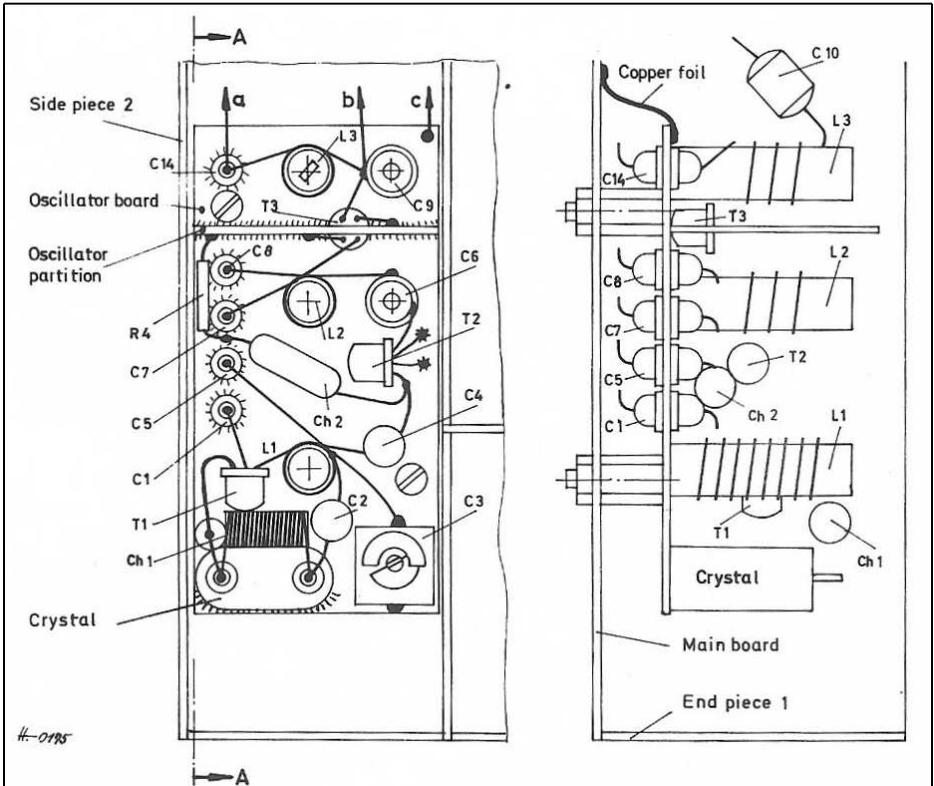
Mechanical assembly of the oscillator portion in chamber IV. Sectional view A-A (see Table 1).
